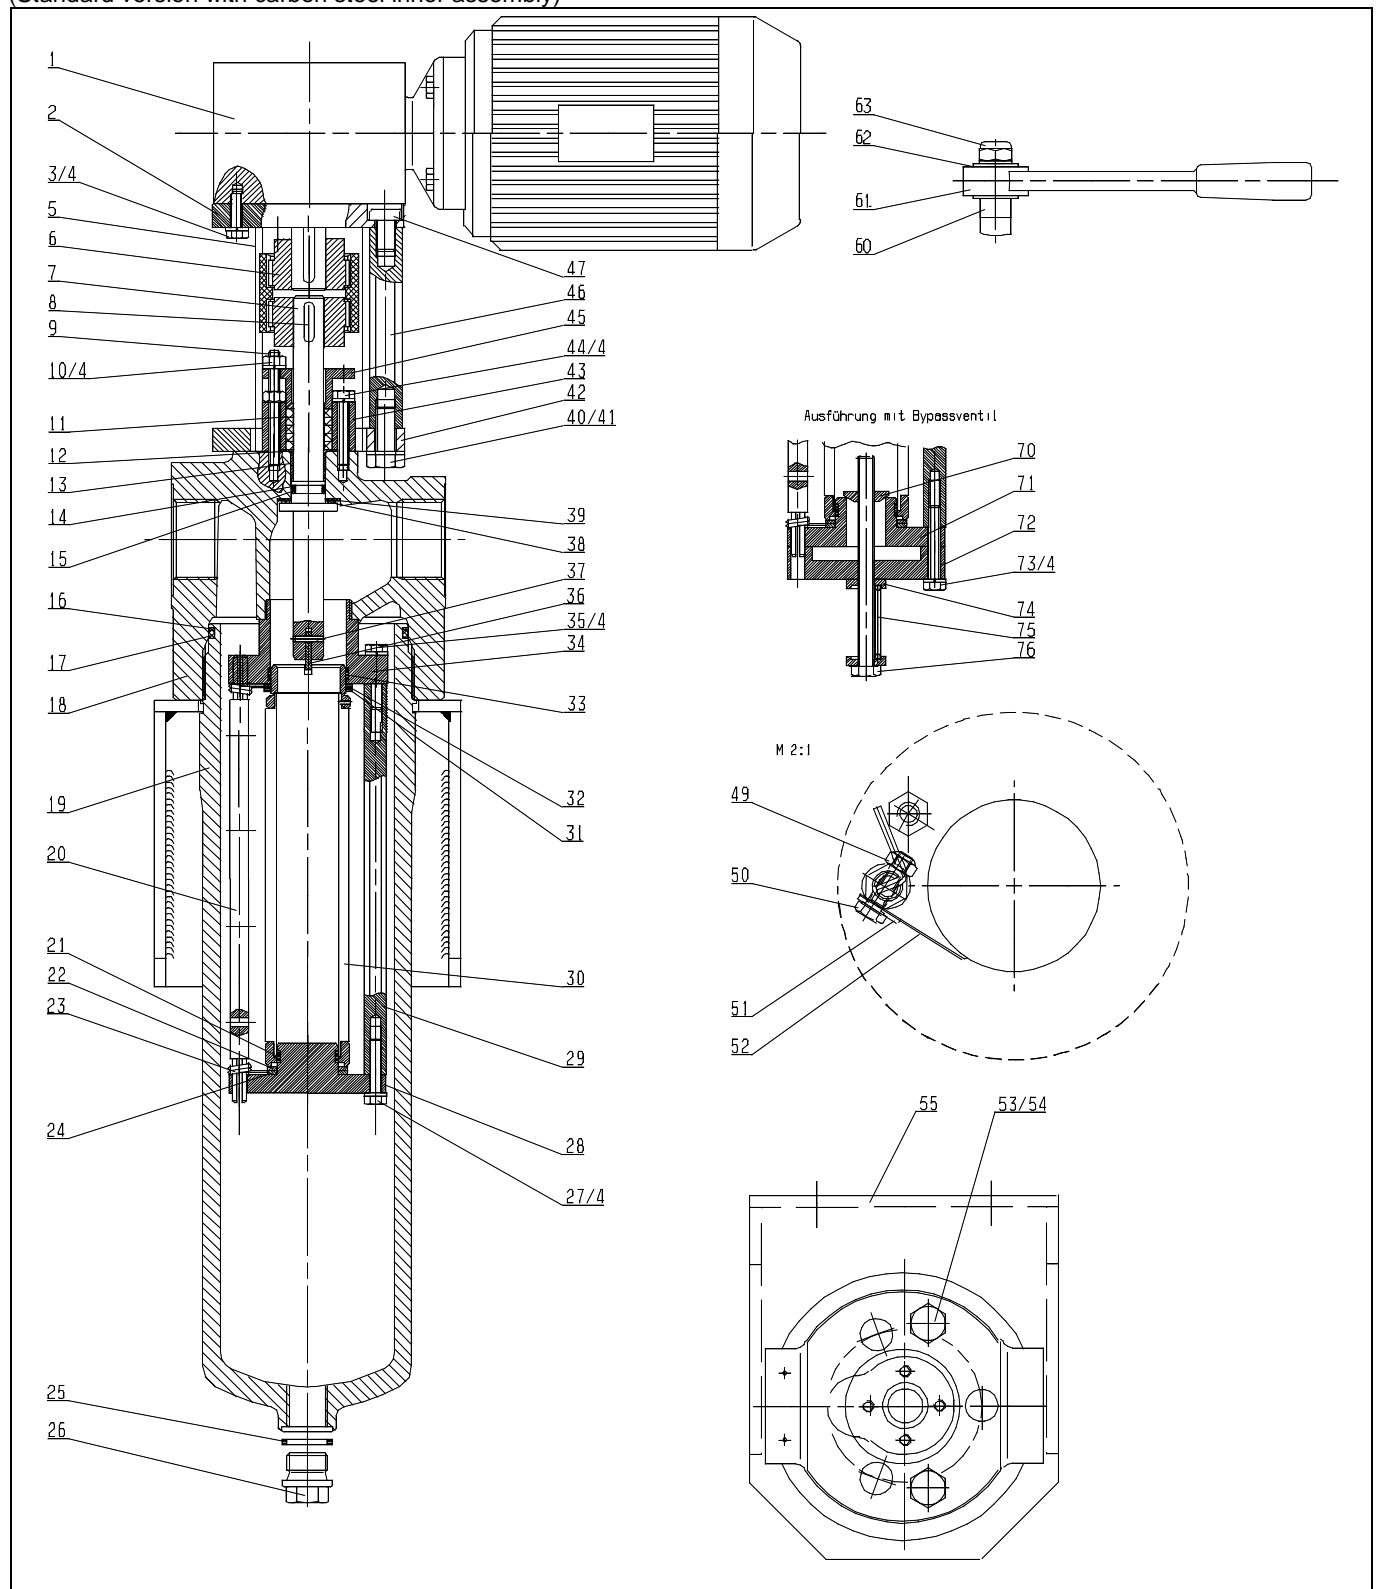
Spare parts drawing for the AF 71H (ID. No.: 971.925.3)
